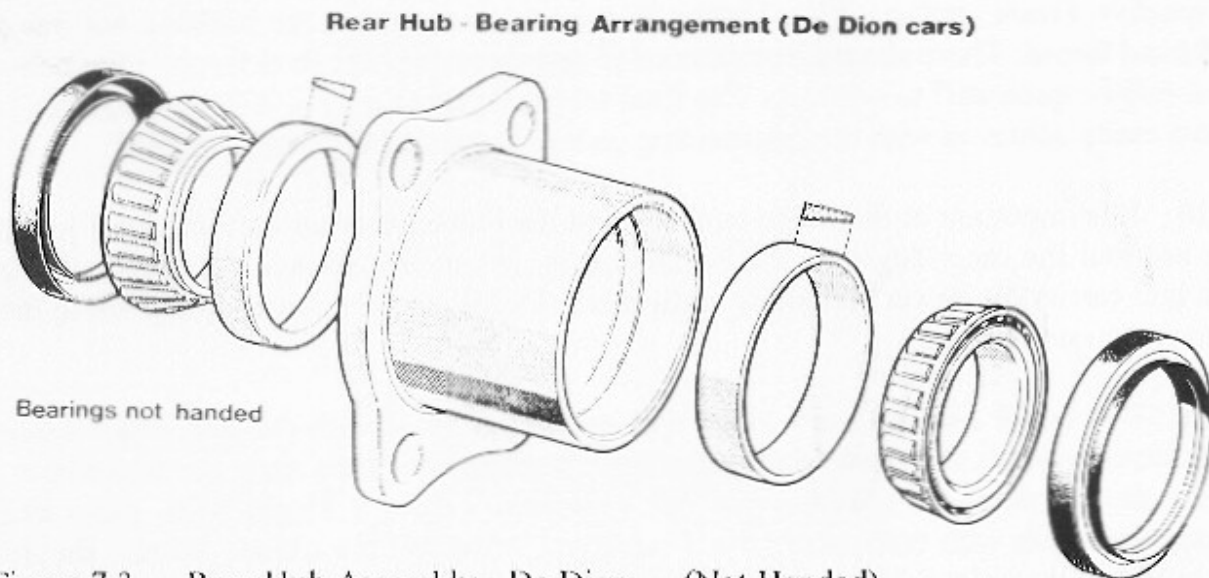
Rear Hub Assembly - De Dion (Not Handed)
